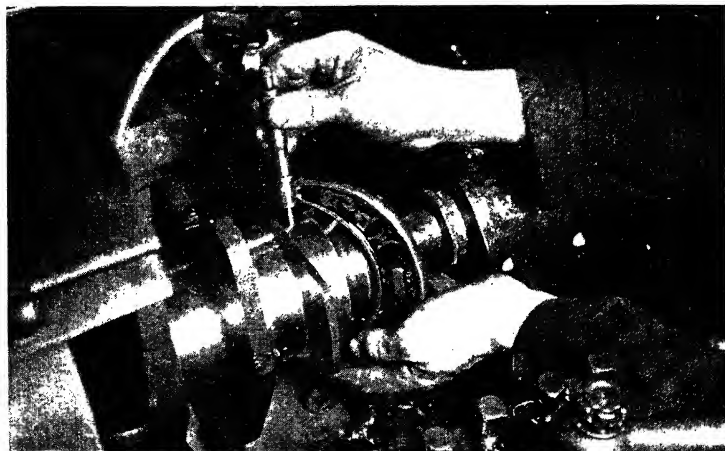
PRODUCTION OF LARGE MACHINED FITTING ON NO. 8 WARD LATHE (4).
